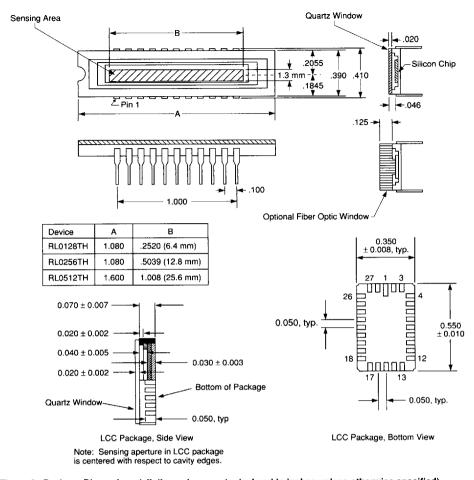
Package Dimensions (all dimensions are typical and in inches unless otherwise specified)
